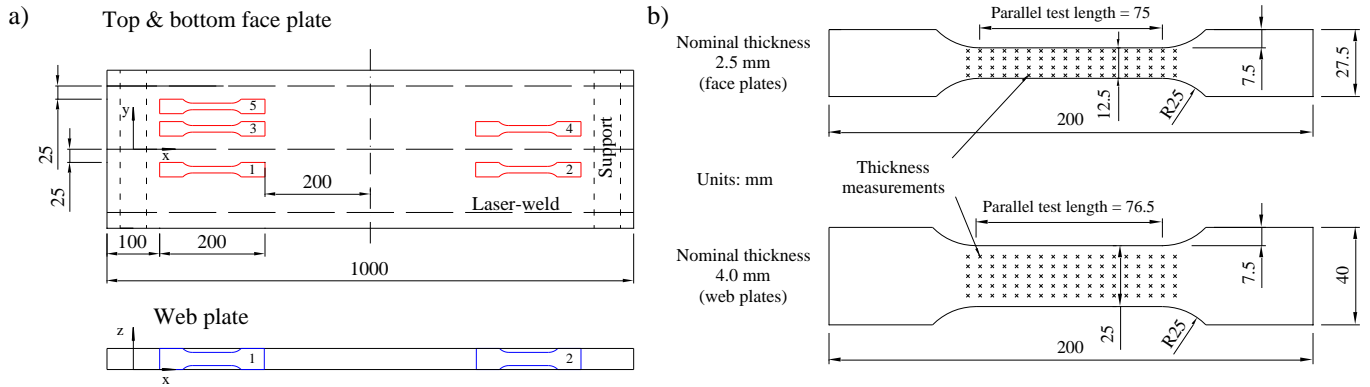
a) Cut-out locations for the tensile specimens; b) Dimensions of the tensile specimens.
